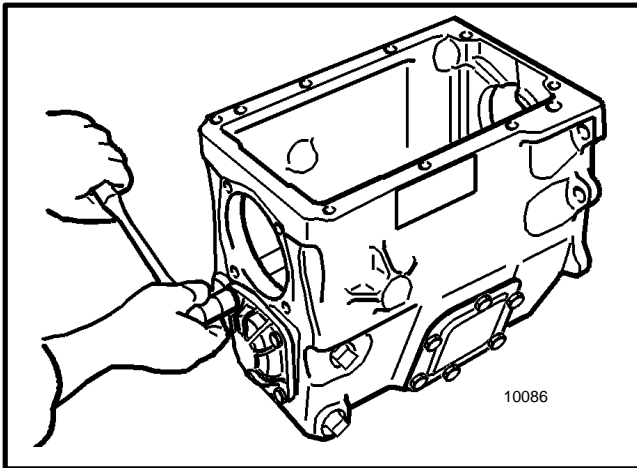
INSTALLING THE BEARING RETAINER FOR THE CLUSTER GEAR
